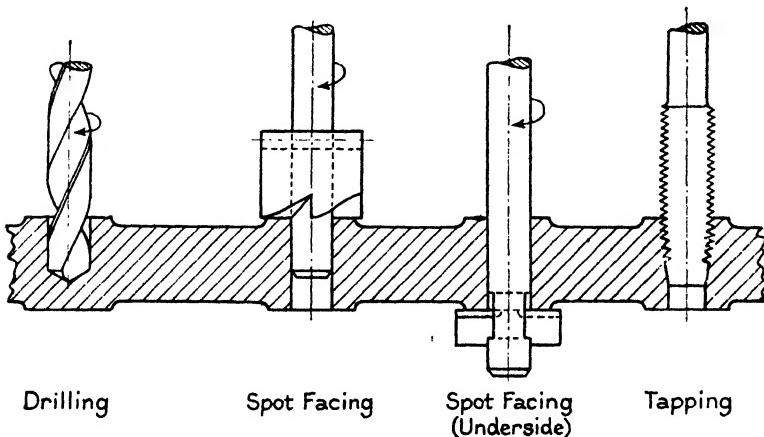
TYPICAL DRILLING MACHINE OPERATIONS
